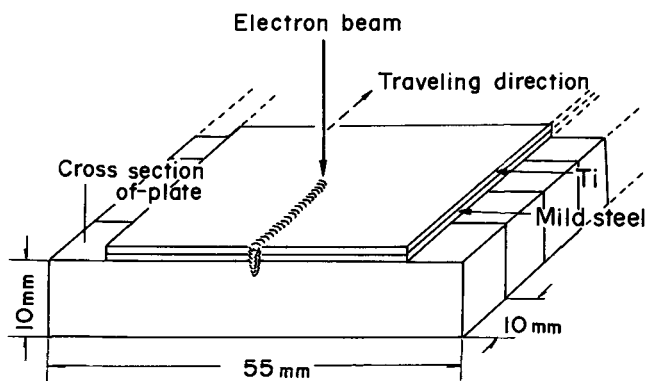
Preparation of the specimen having brittle weld crack.
